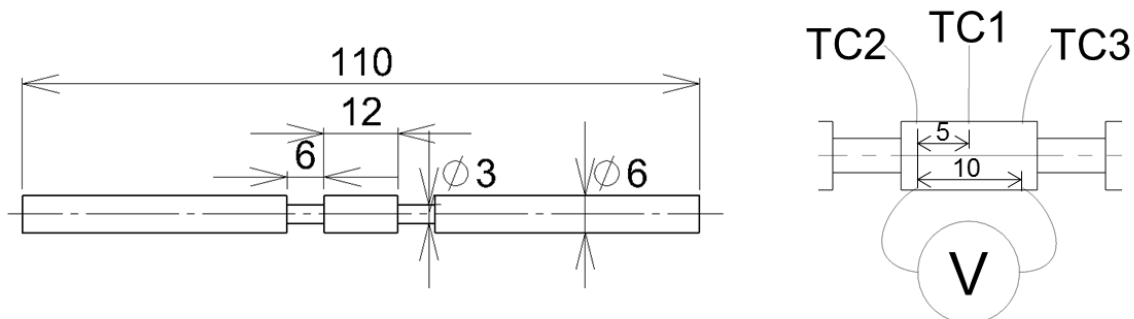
Specimen geometry used for resistivity measurements with dimensions in millimeters (left) and position of thermocouples (right).
